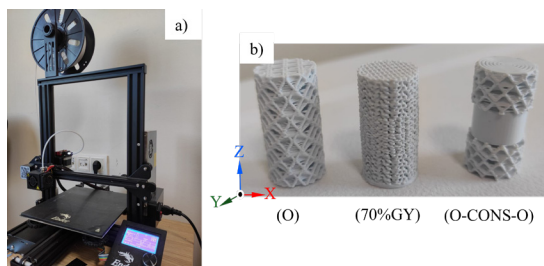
Fabrication of the test specimens, a) Creality Ender 3 Pro 3D printer, b) Compression test samples.
